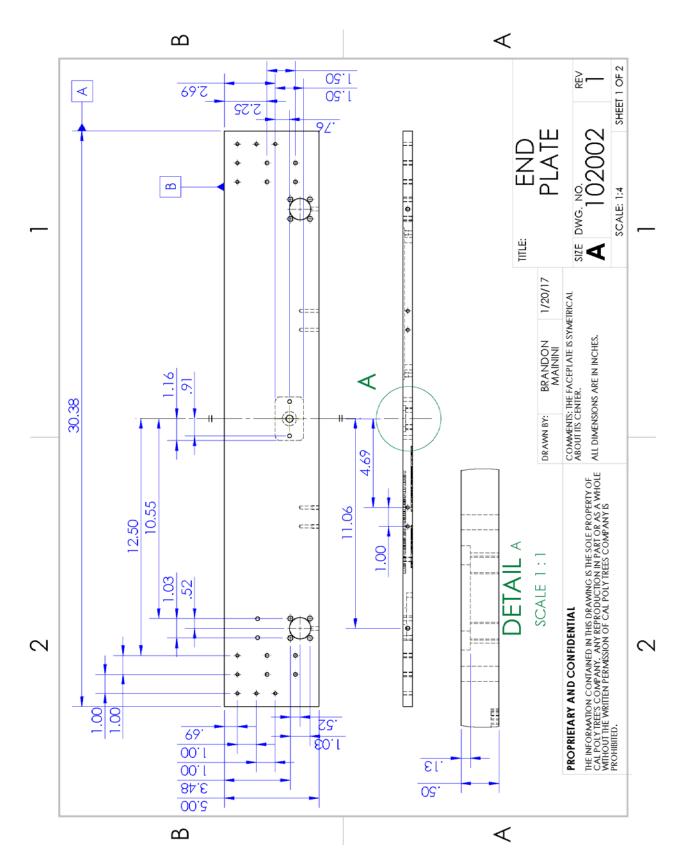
End Plate Detail Drawing Sheet 1 of 2
